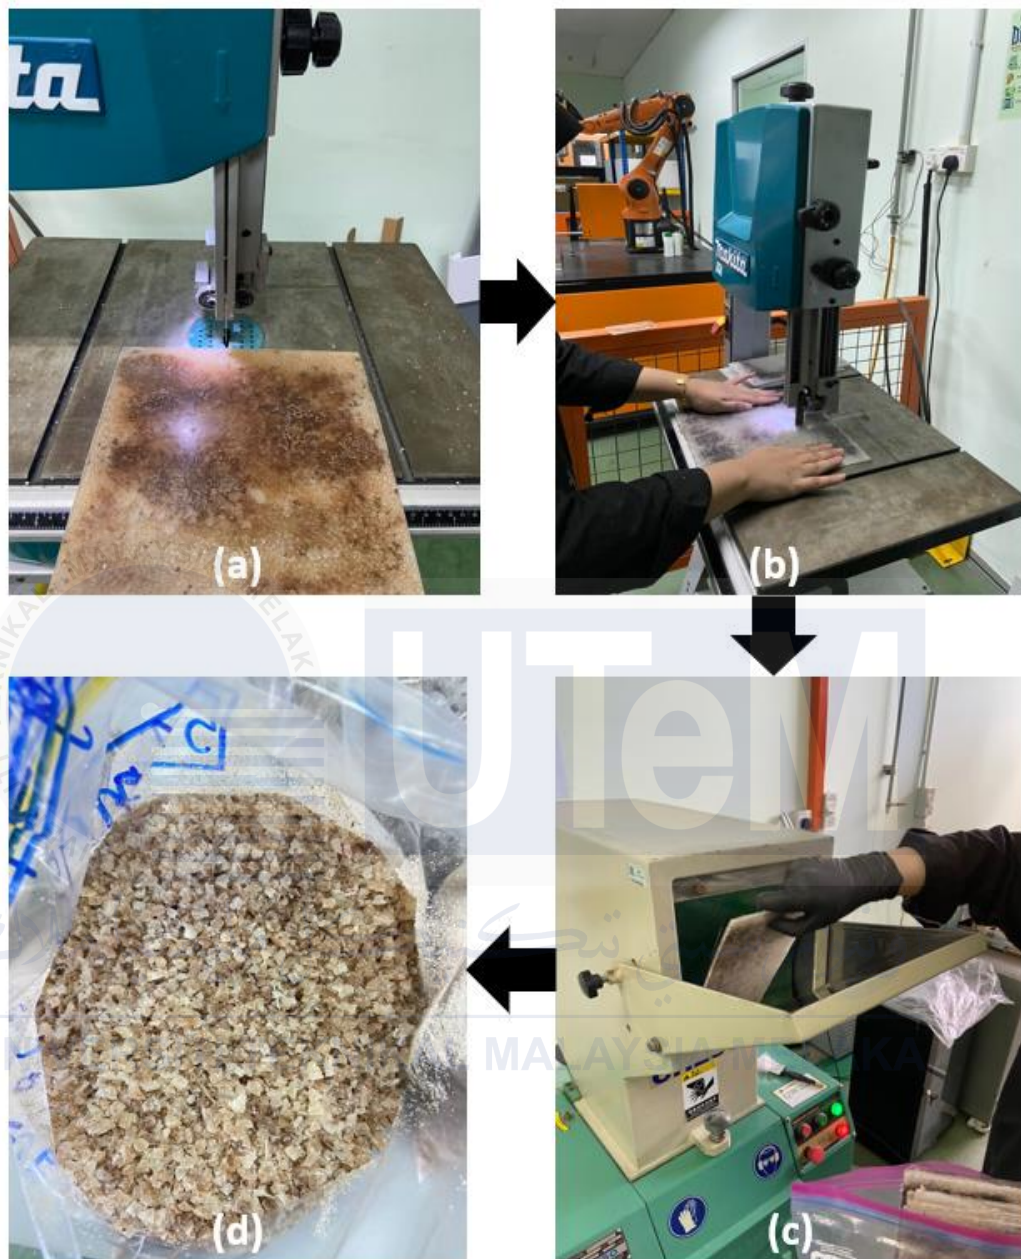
Pellet fabrication; (a) composite on the cutting machine, (b) cutting process, (c) insert composite into crusher machine, (d) required size of pellet
